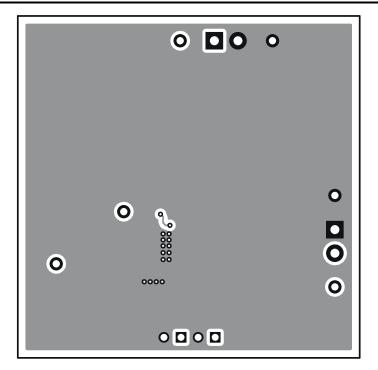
Bottom-Side Layout (Looking From Top Side)
